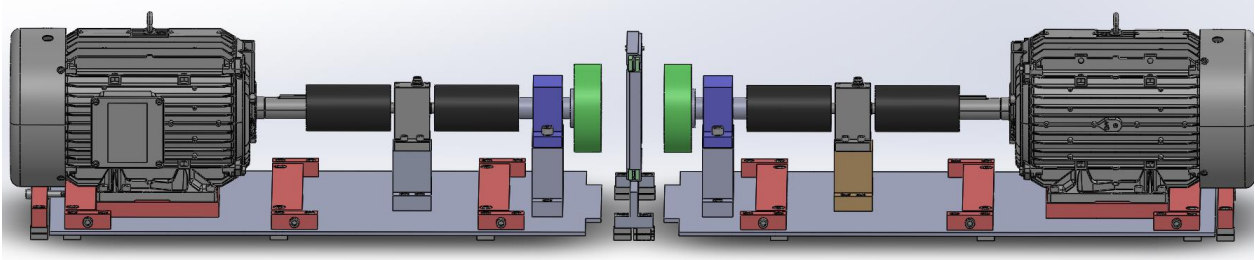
SolidWorks Model of Testbed and Prototype – Side View.
